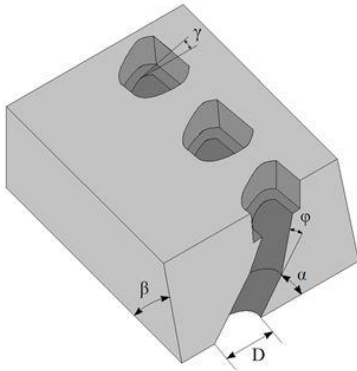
The schematic view of compound trenched shaped cooling hole [104]
